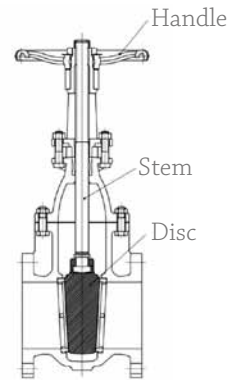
Flanged end type (valve where the facing flange couplings are connected by tightening the gasket with bolts and nuts)³
